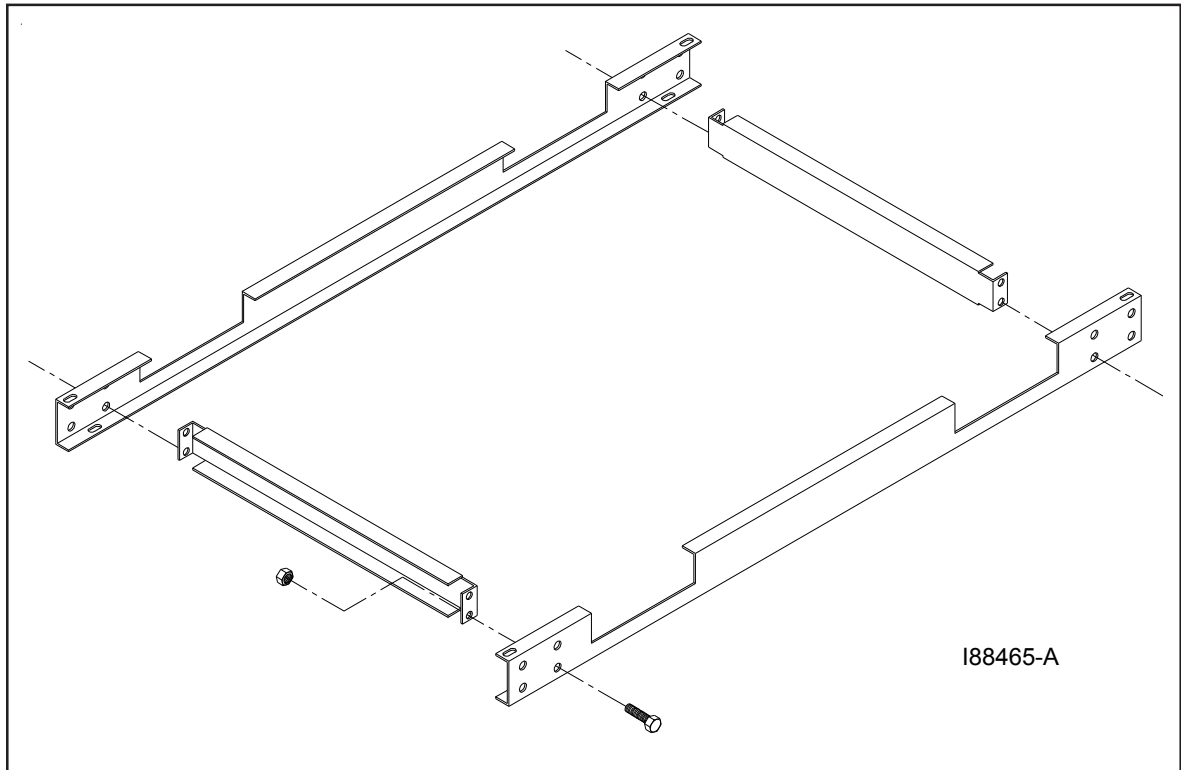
E - Dual-Stacked Boiler Adaptor Bracket
